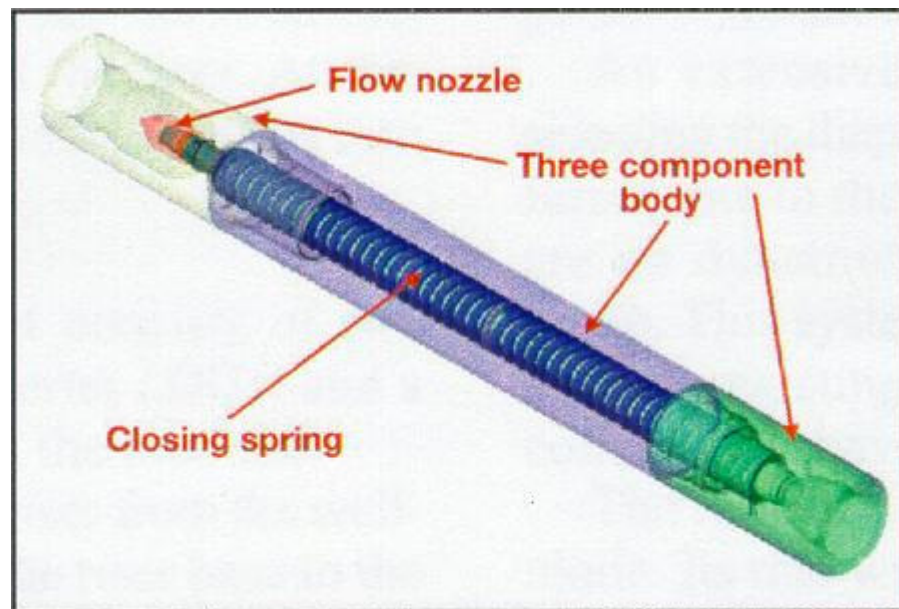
Drill String Valve (DSV) (Juvkam-Wold 2007).
